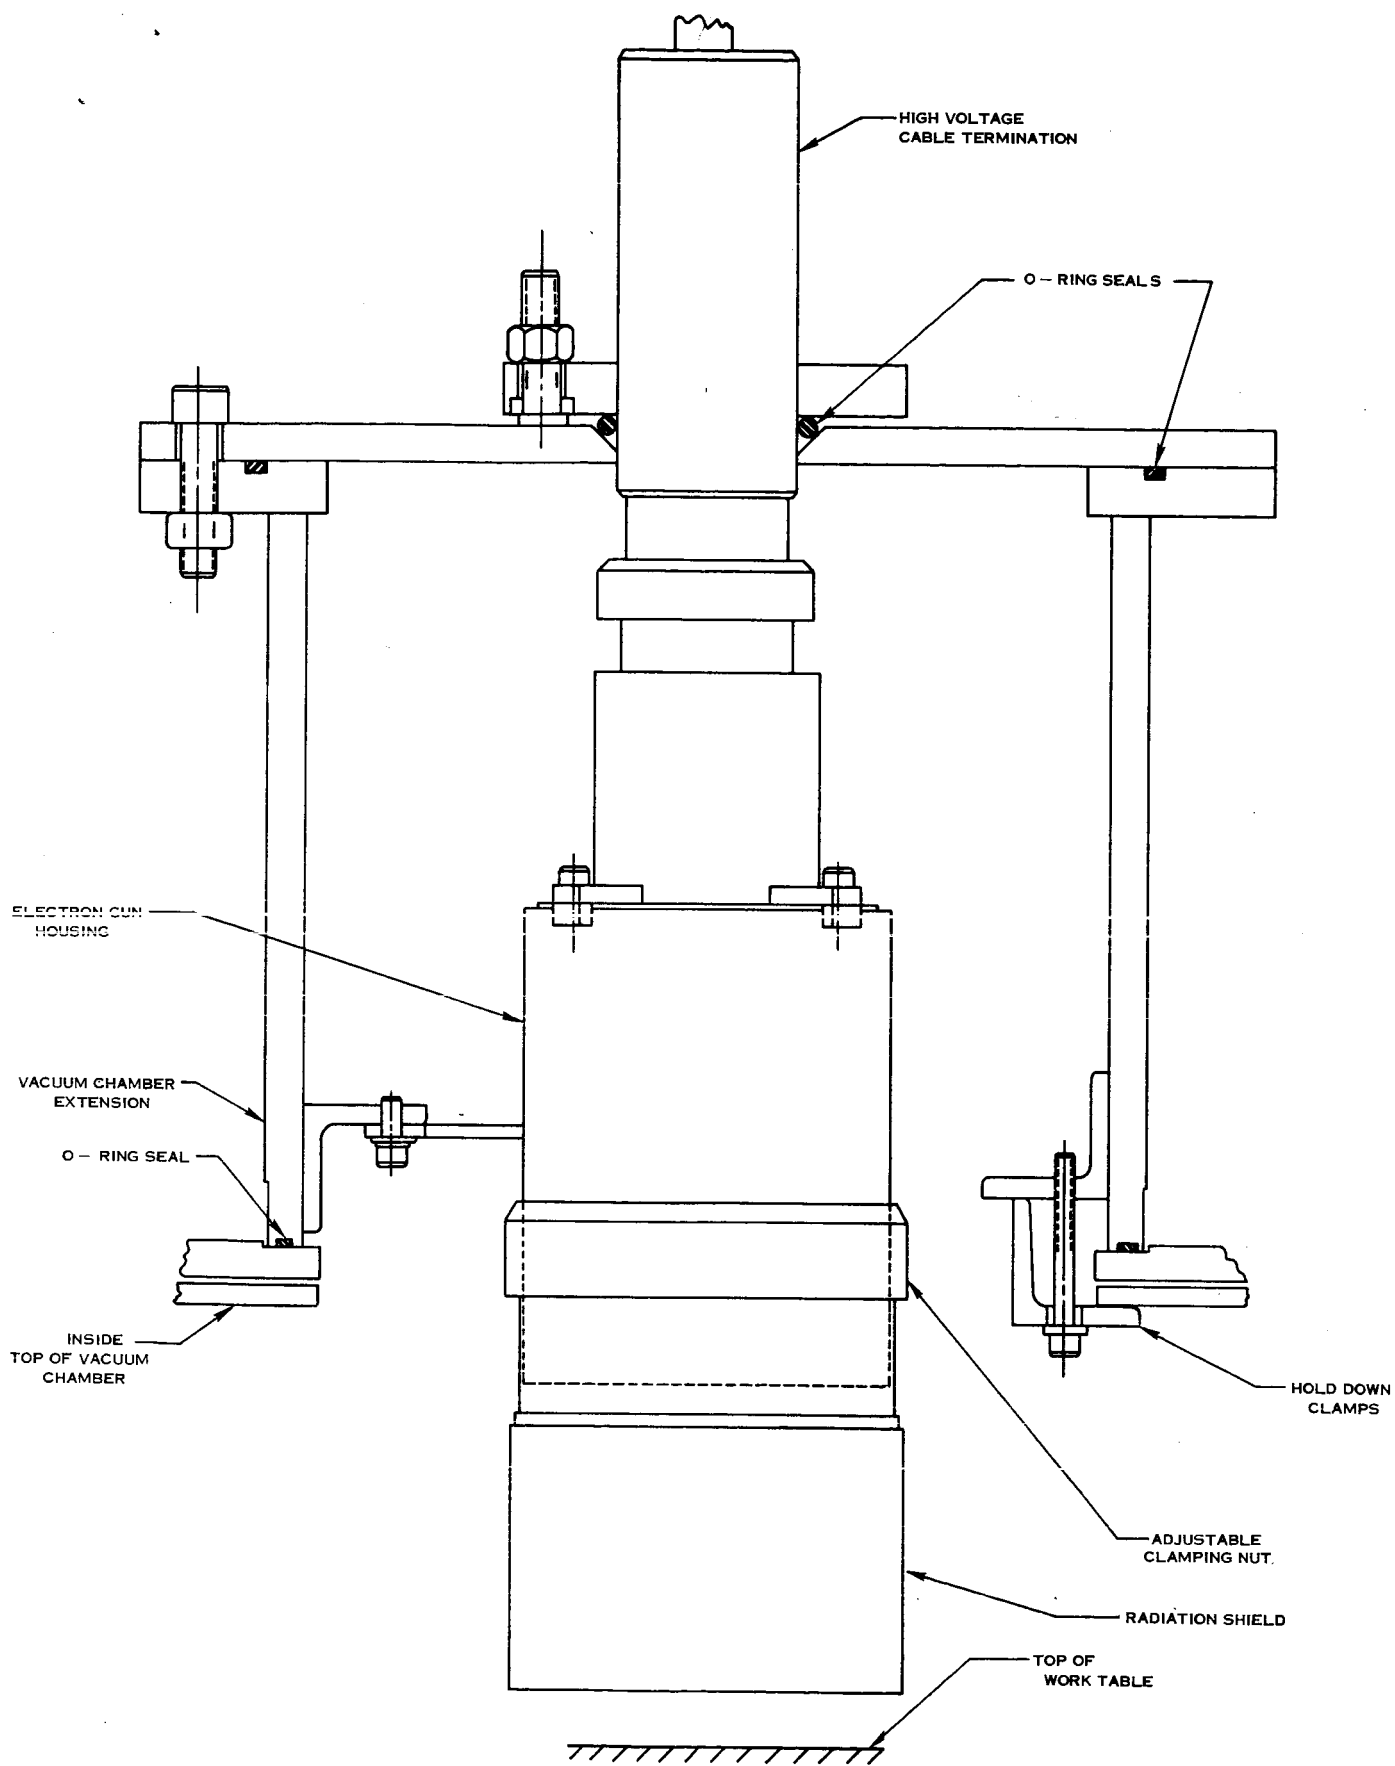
PRELIMINARY GUN ASSEMBLY FOR TEST.
